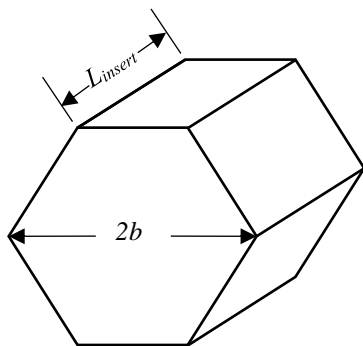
Dimensions of a single hexagonal insert within the overall honeycomb insert.
